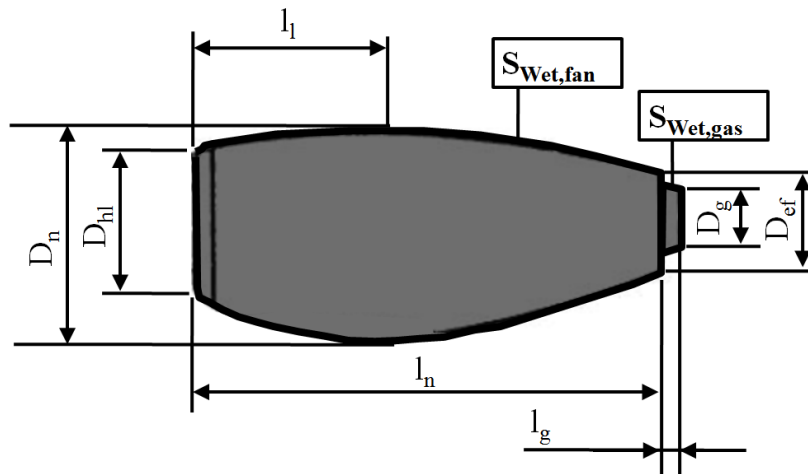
Learjet 35A/36A Engine Nacelle Geometry for a TFE-731-2B-2 Engine
